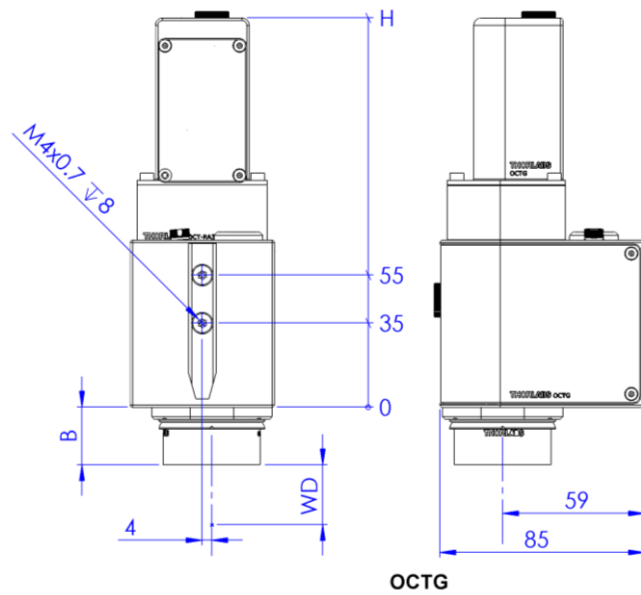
Drawing showing Dimensions, Mounting Options, and Focal Plane
